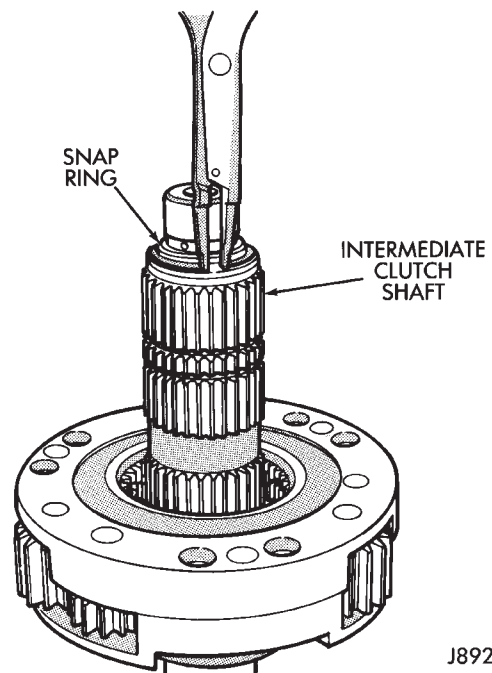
Intermediate Clutch Shaft Snap Ring Removal
